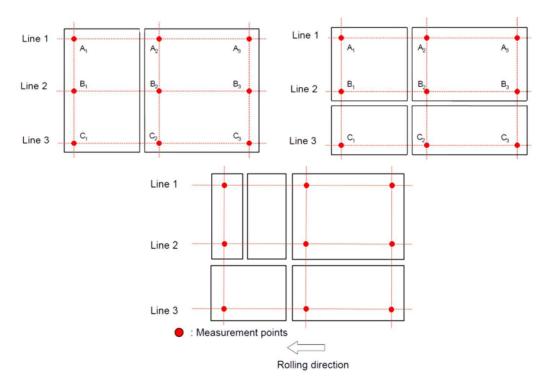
Locations of Thickness Measuring Points for Cut Steel Plates
